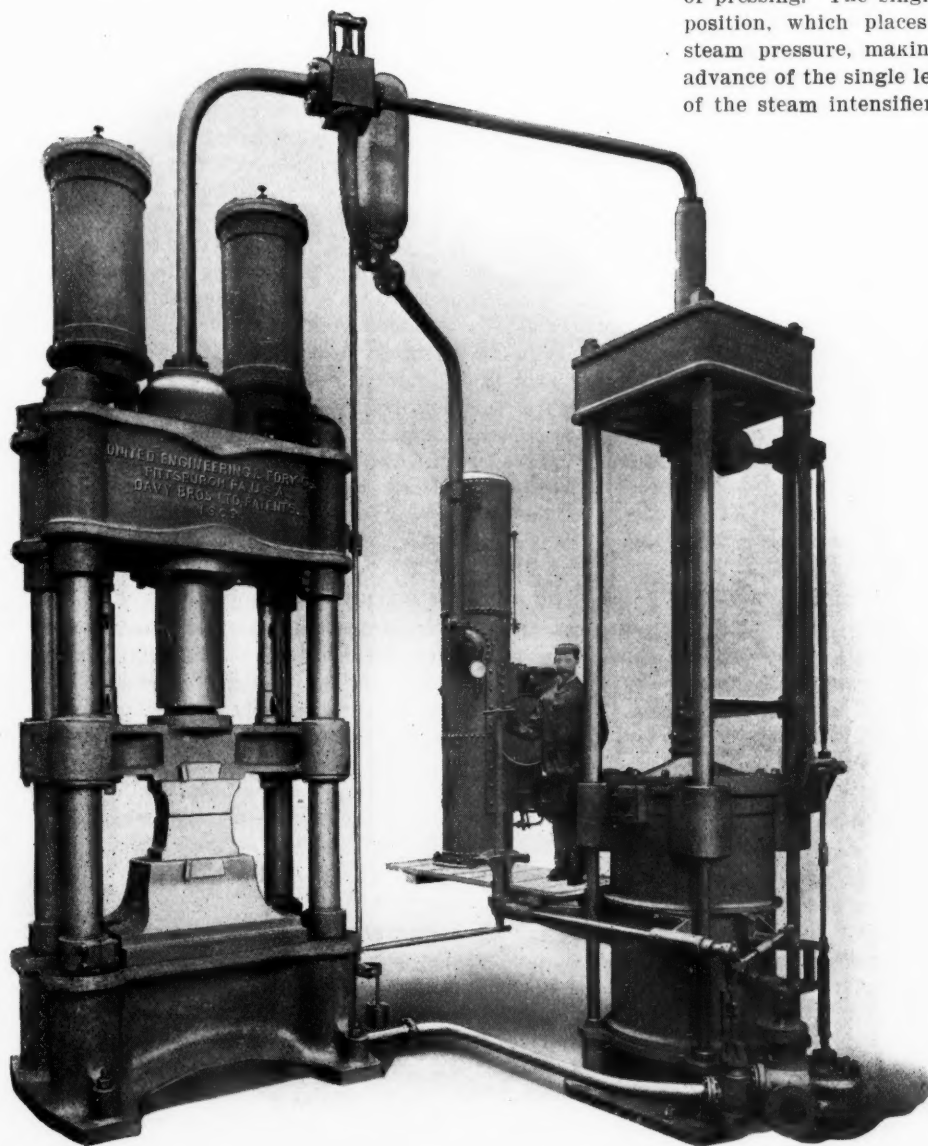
Rapid Action Steam-Hydraulic Forging Press; Four Column Type, Single Cylinder.
